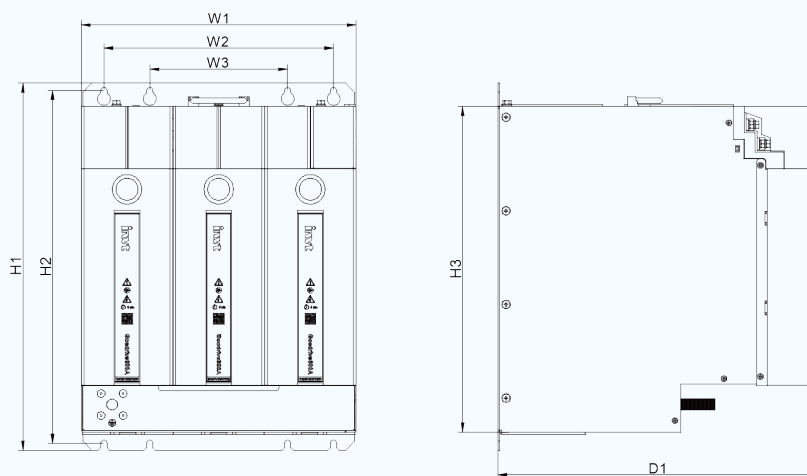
Wall mounting drawing for the 380V 90–160kW inverter units
